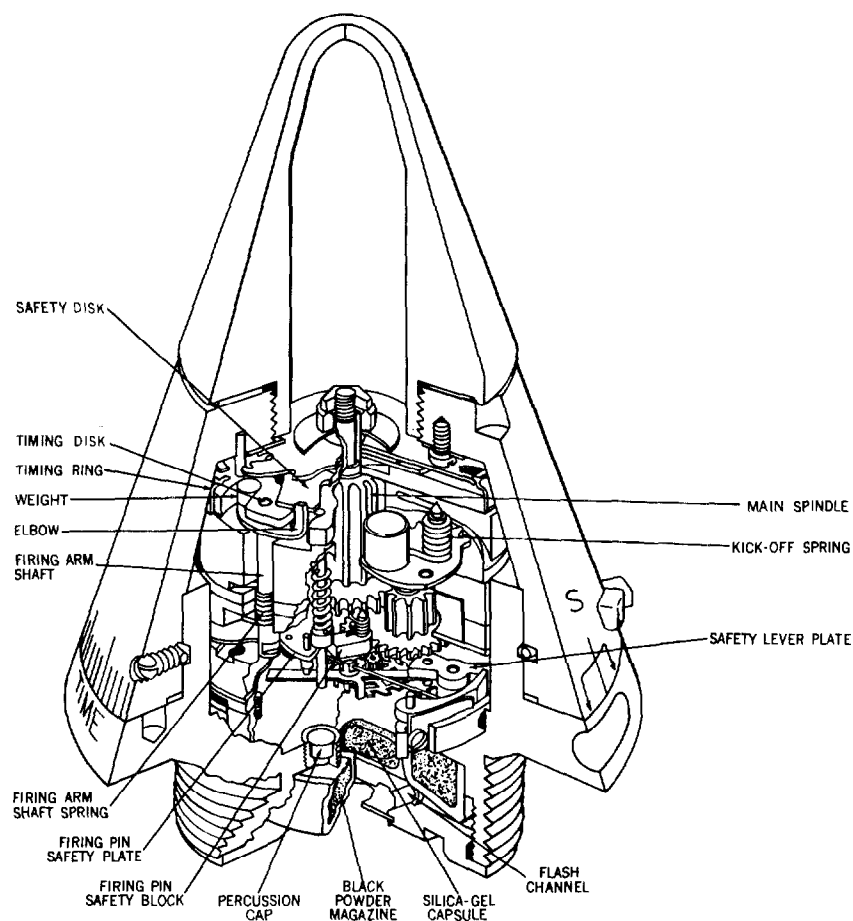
Mechanical Time Fuze Mk 61 Mod 1, Cutaway View
